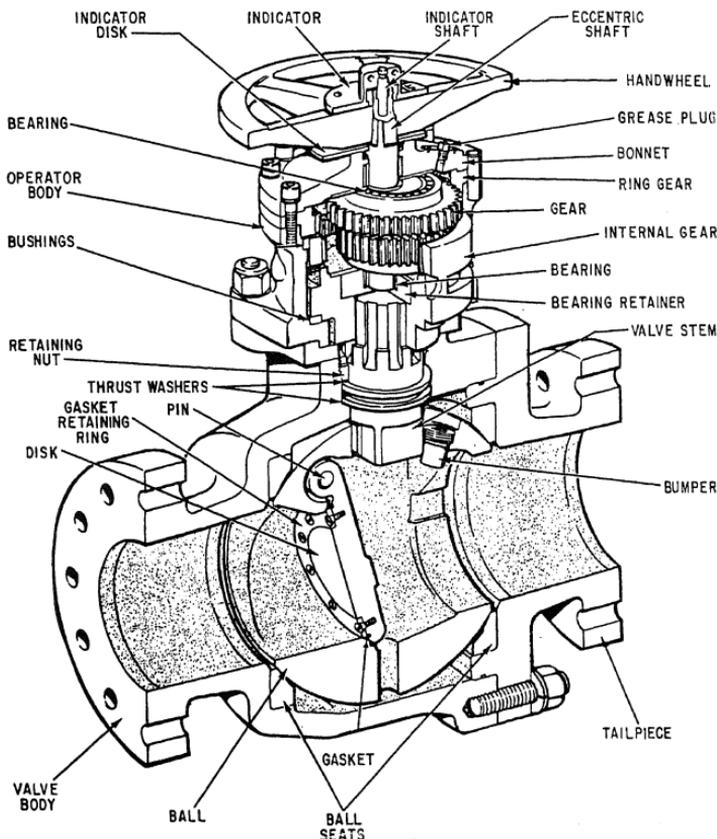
Typical ball stop swing-check valve for seawater service.
